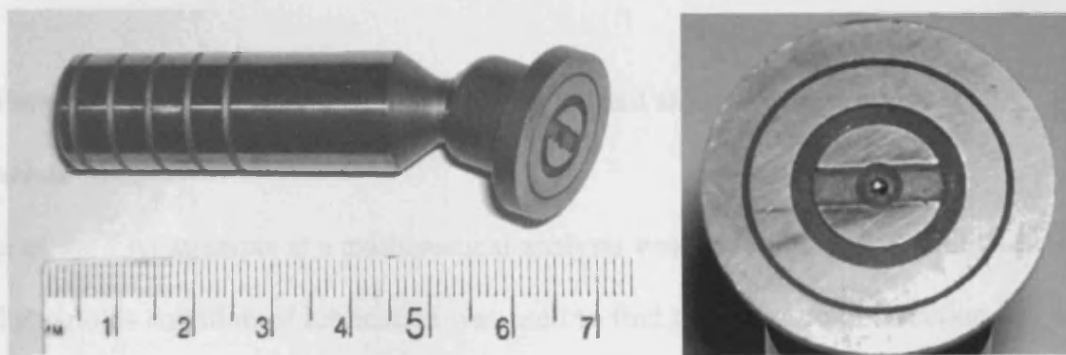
Piston and slipper assembly [Courtesy Oilgear Towler UK Ltd]
